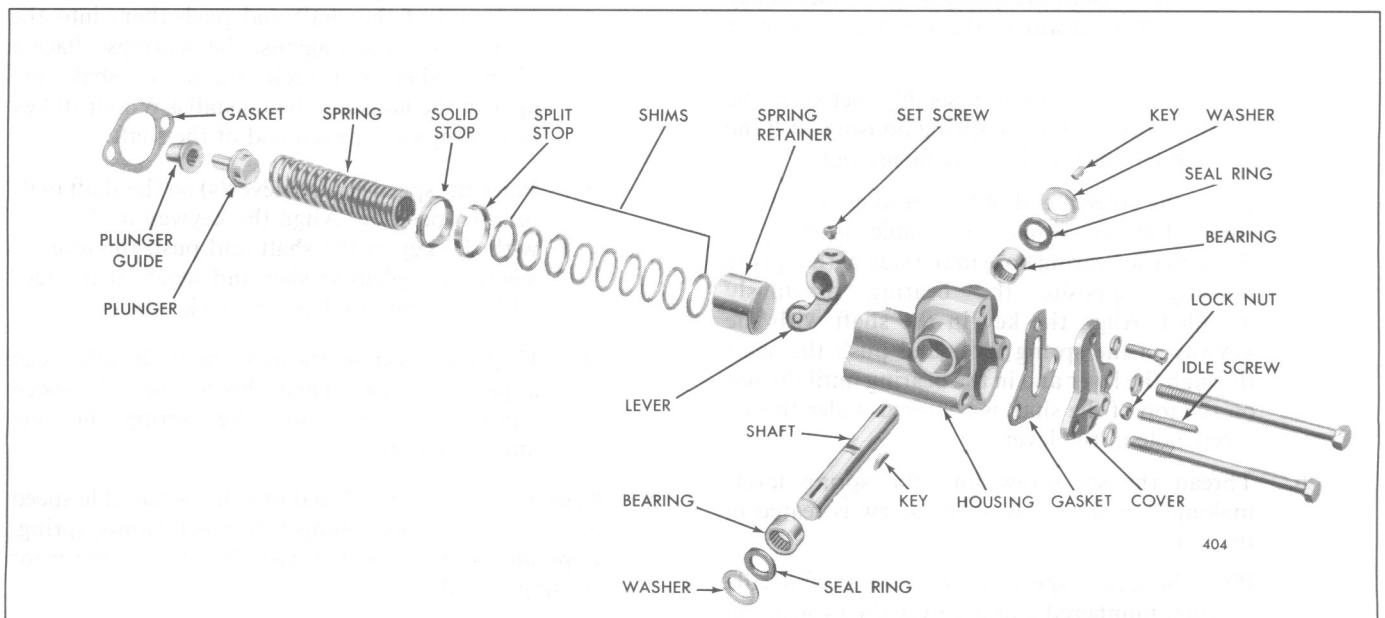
Variable Speed Spring Housing Details and Relative Location of Parts
